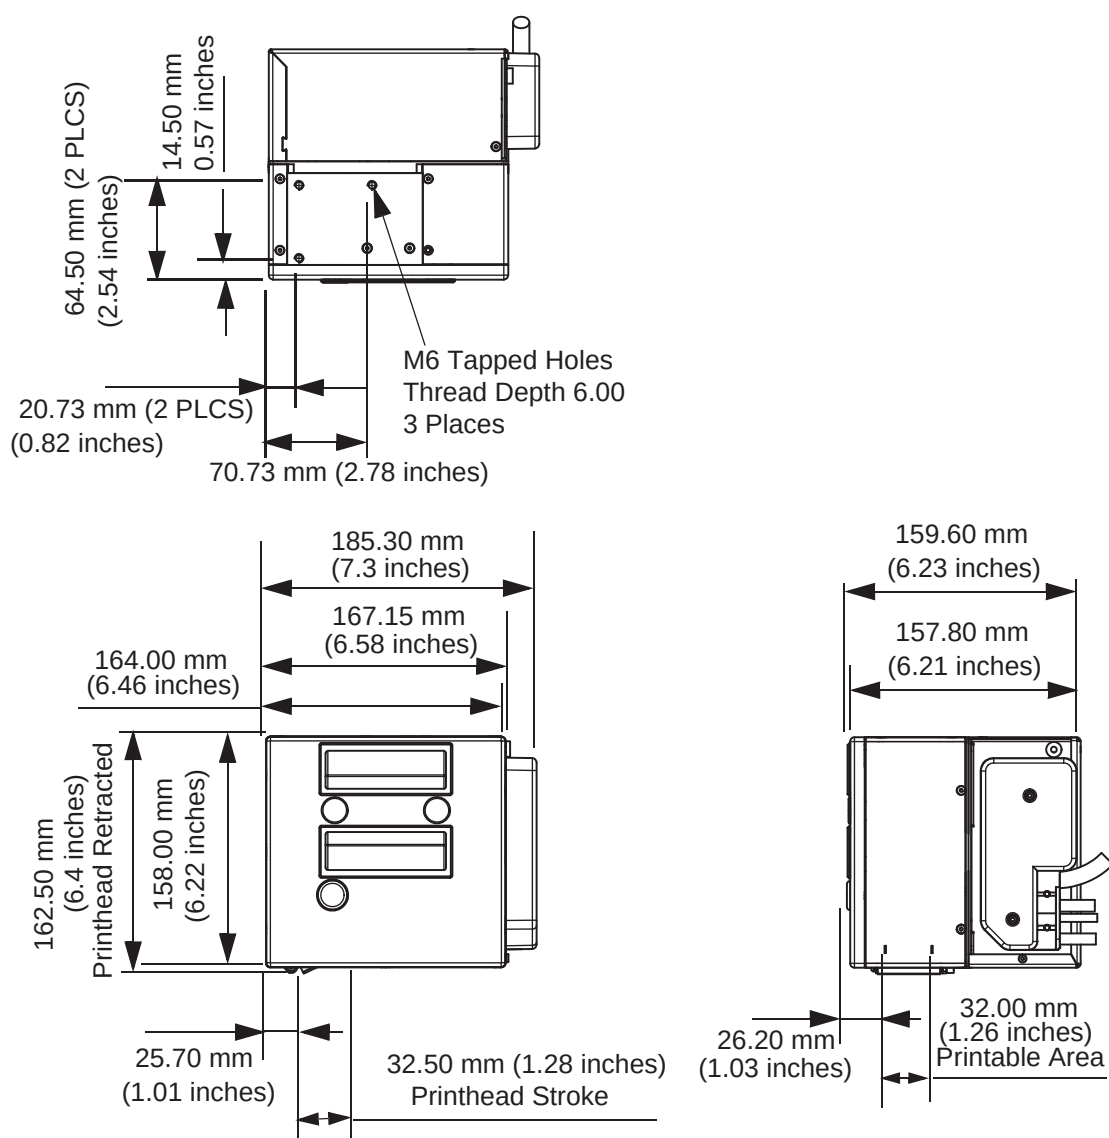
Videojet 6210 30 mm RH Printer Dimensions
